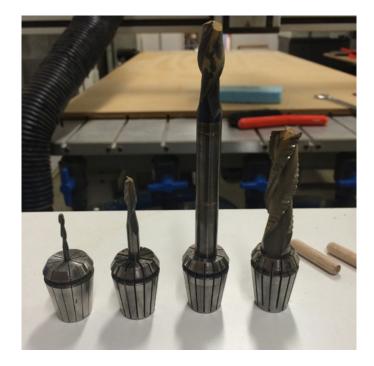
(above) CNC cutting tools from left 3mm ball nose, 6mm down cutter, 14mm ball nose and 16mm chipbreaker (roughing). Each tool has it's own collet, which is loaded into the spindle, and zeroed off on the table before milling. Author's image 2017
